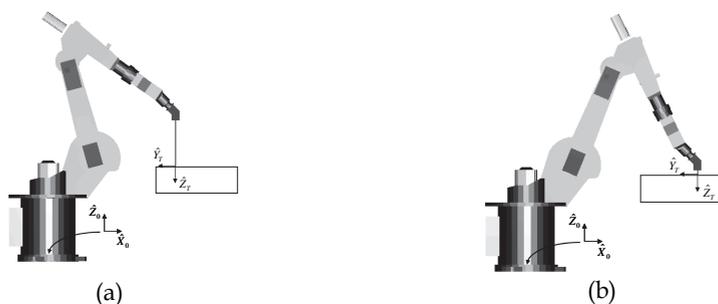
Initial (a) and final (b) robot positions during shielded metal arc welding for a  $90^\circ$  welding angle.
